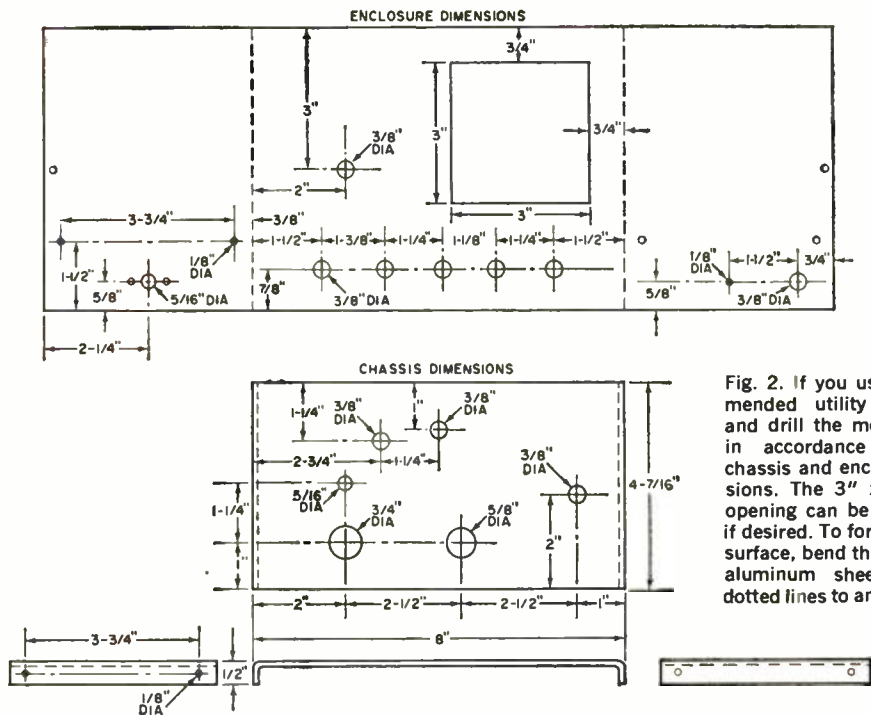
If you use the recommended utility box, punch and drill the mounting holes in accordance with these chassis and enclosure dimensions. The 3" x 3" speaker opening can be made round, if desired. To form the chassis surface, bend the edges of the aluminum sheet along the dotted lines to an angle of 90°.
